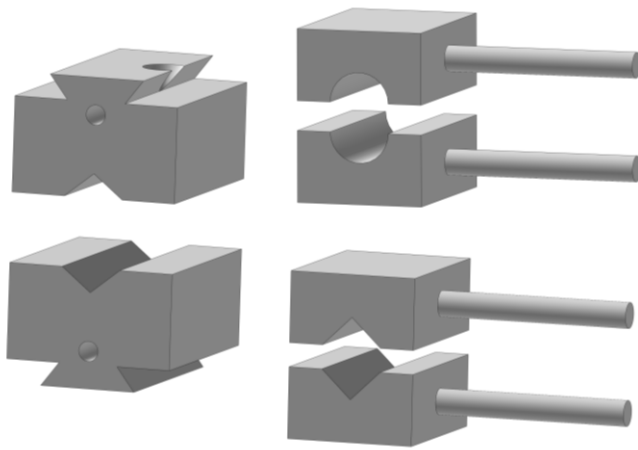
Semicircular dies for drawing out of the round workpiece
